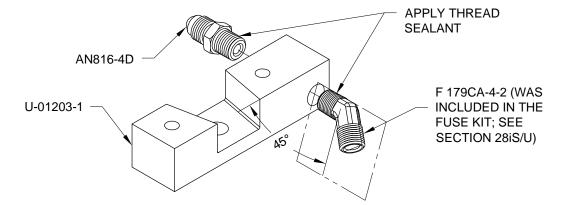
INBOARD MAIN GEAR ATTACH BRACKET FITTINGS
